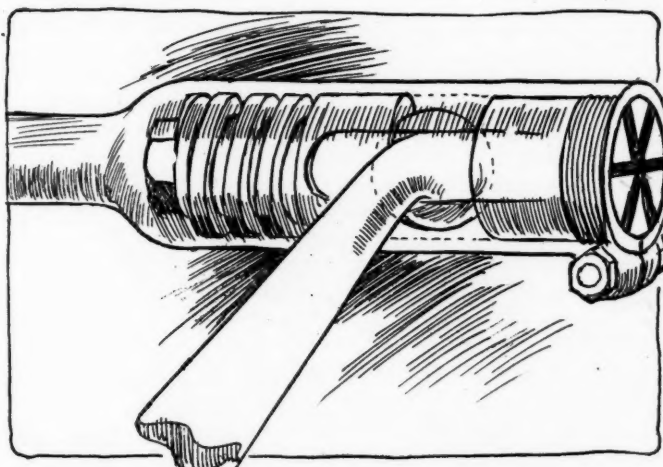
Construction of ball joint used on steering rod. Wear is taken up by screwing up on the nut at the right
